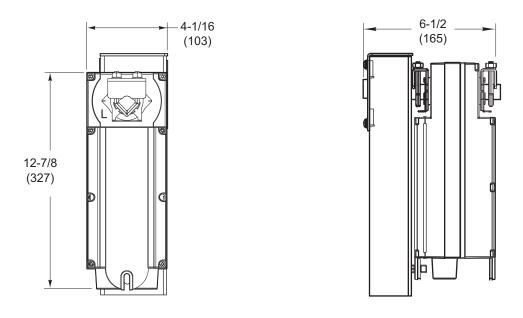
Mx40-717x-230 Actuator/Linkage Assembly
